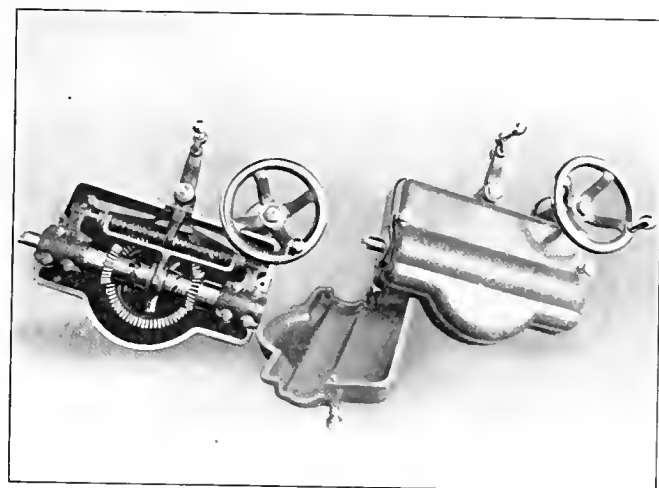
Example showing Principle of Unit Construction followed in the Design of the Heald Co.'s Machines.
